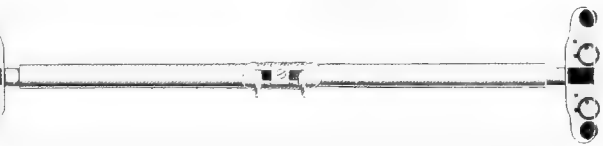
Ring Fixtures with Flanges for Enclosed Grooves, 5/8 in. by 5/8 in., with Pinch Handles.
